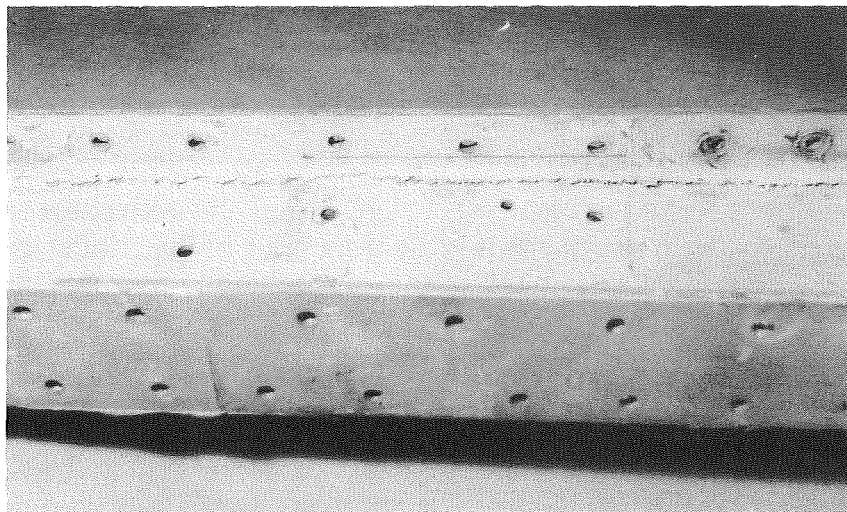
View of web/flange intersection fatigue failure in front spar.
